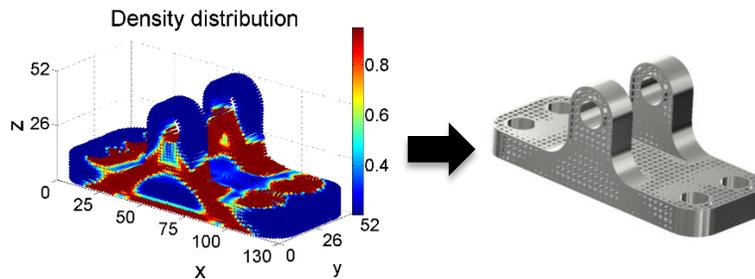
The reconstruction process for pillow bracket with cubic cellular structure
